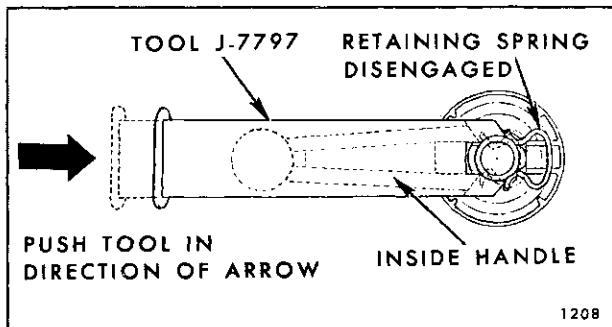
Door Inside Handle Removal - Spring Clip Retained
